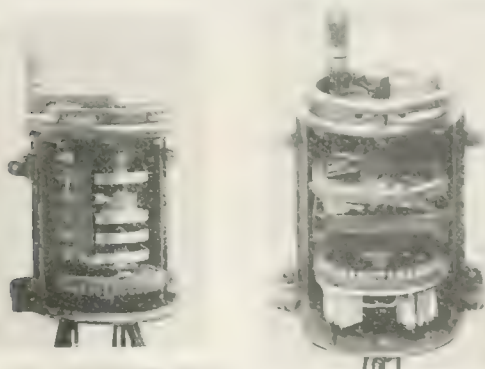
MACHINE TOOL CONTROLLER — COMBINATION DRUM AND FACE-PLATE TYPE
